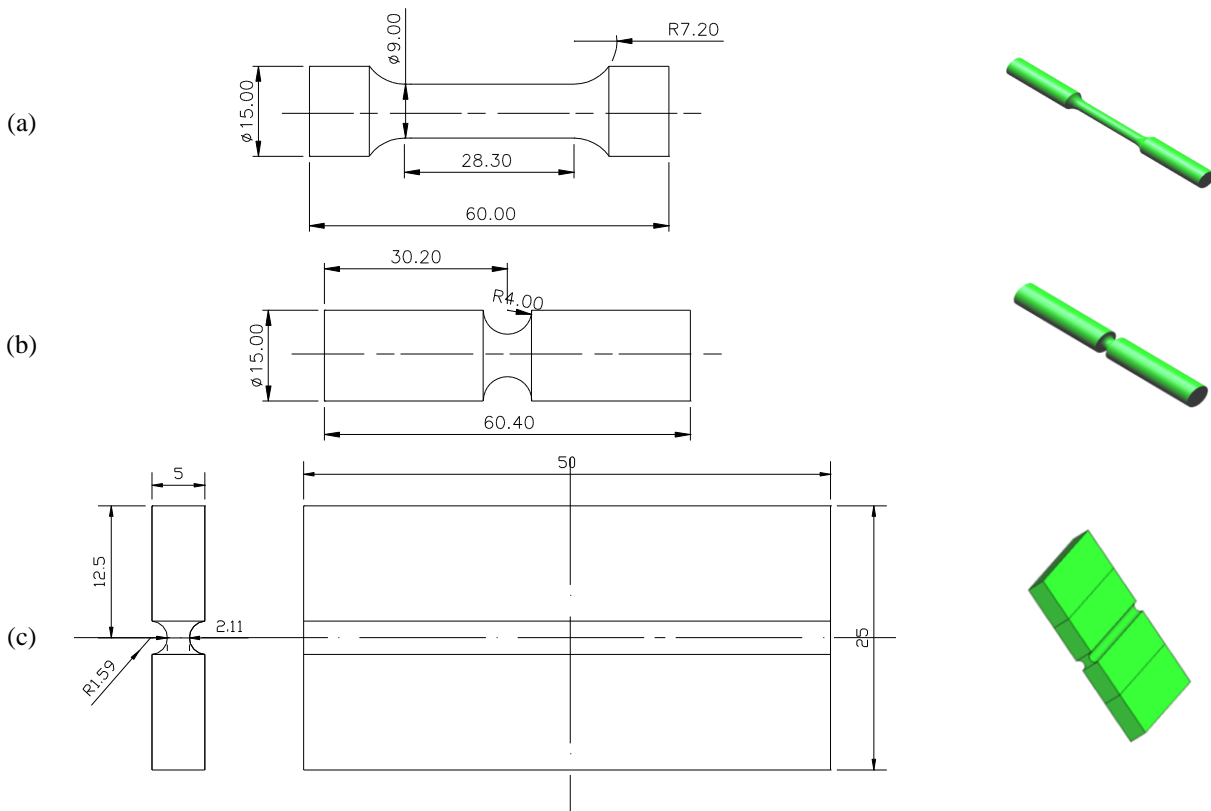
Geometry of the cylindrical smooth and notched bars, and for a flat grooved plate specimens (dimensions in mm), see Bai (2008).
